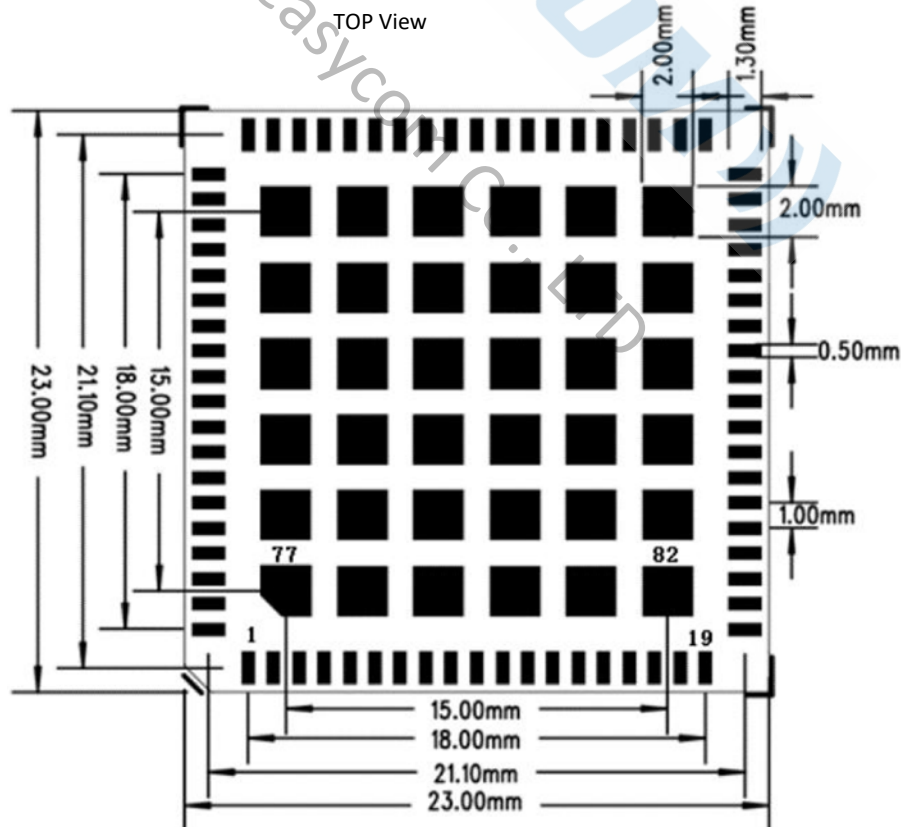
FSC-BW1501UV footprint Layout Guide (Top View)
